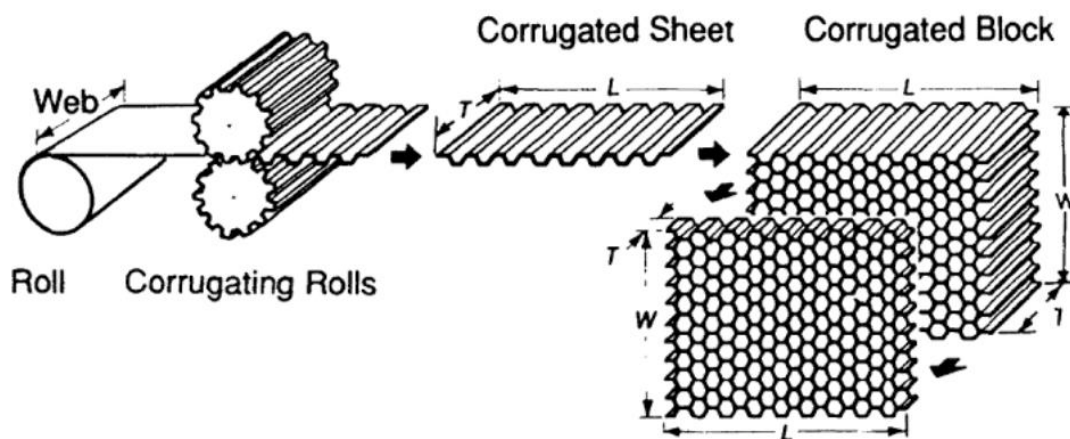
Corrugation of sheet materials and bonding of corrugated sheets to make a honeycomb core [28]
